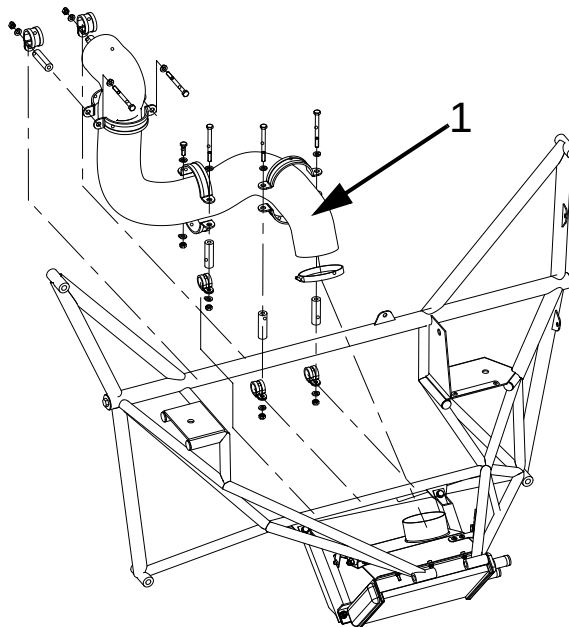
Air Hose System C-172 R,S with TAE 125-01 installation
